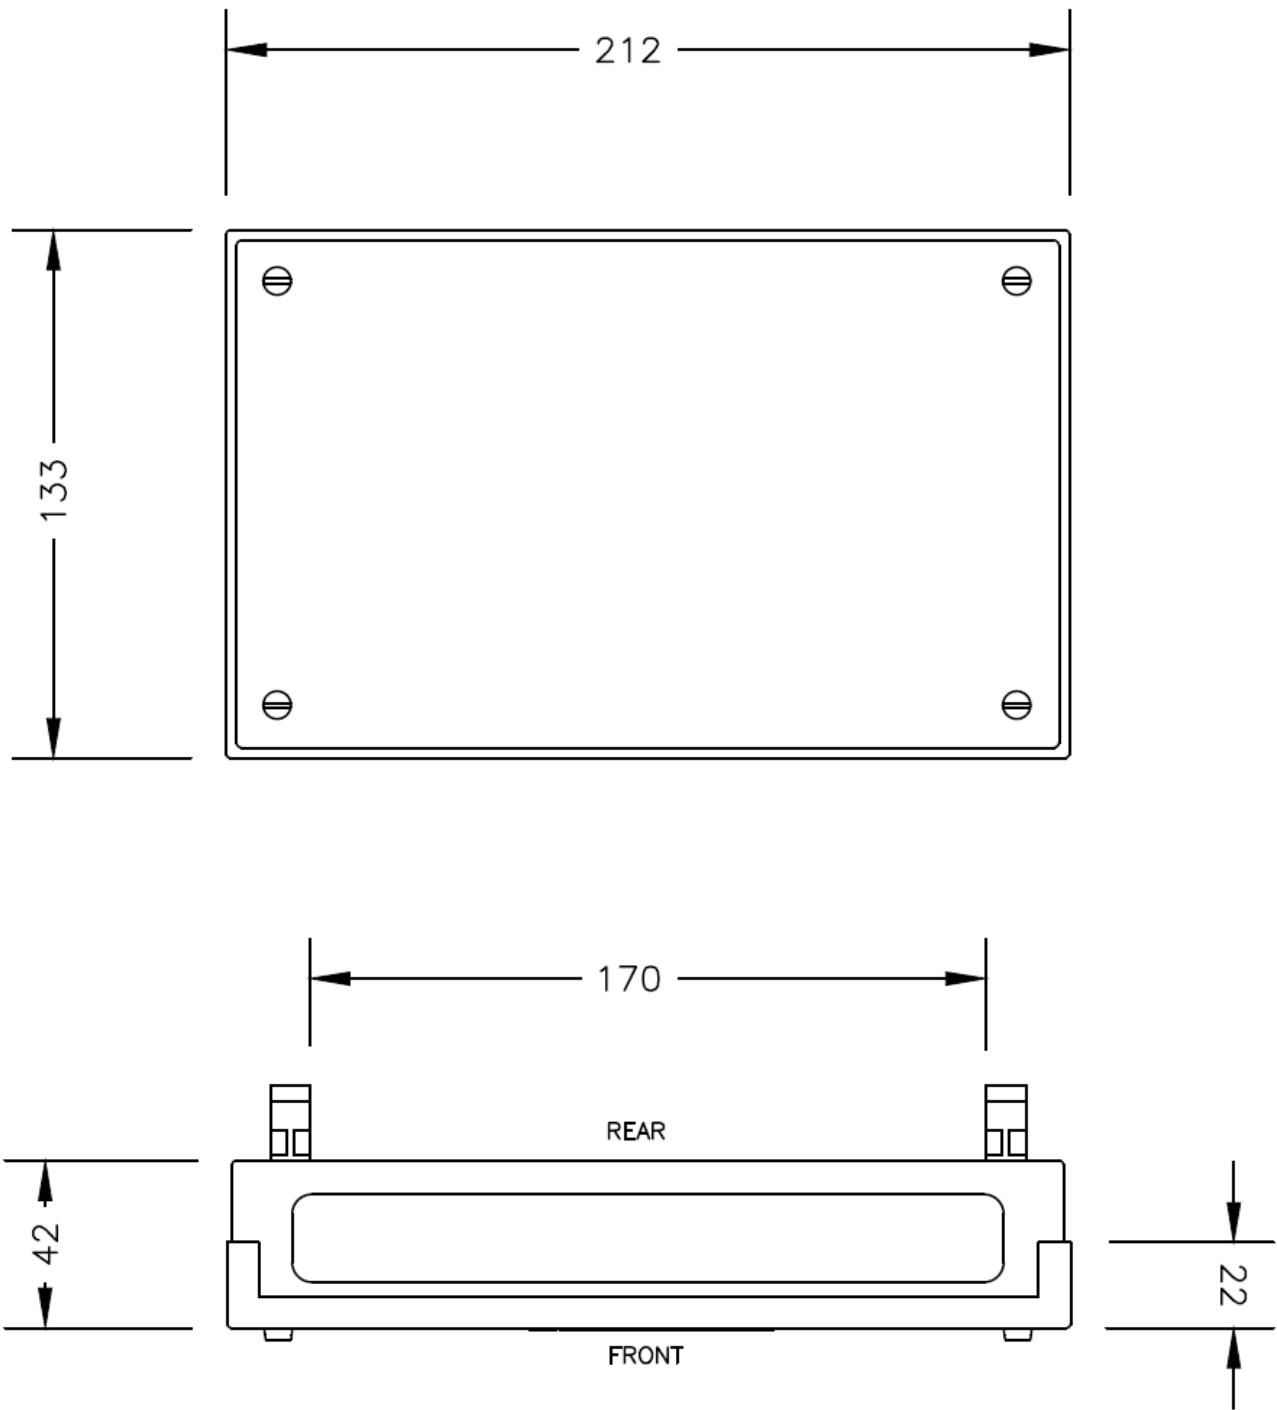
i: Mk8 I/O Module Dimensions
